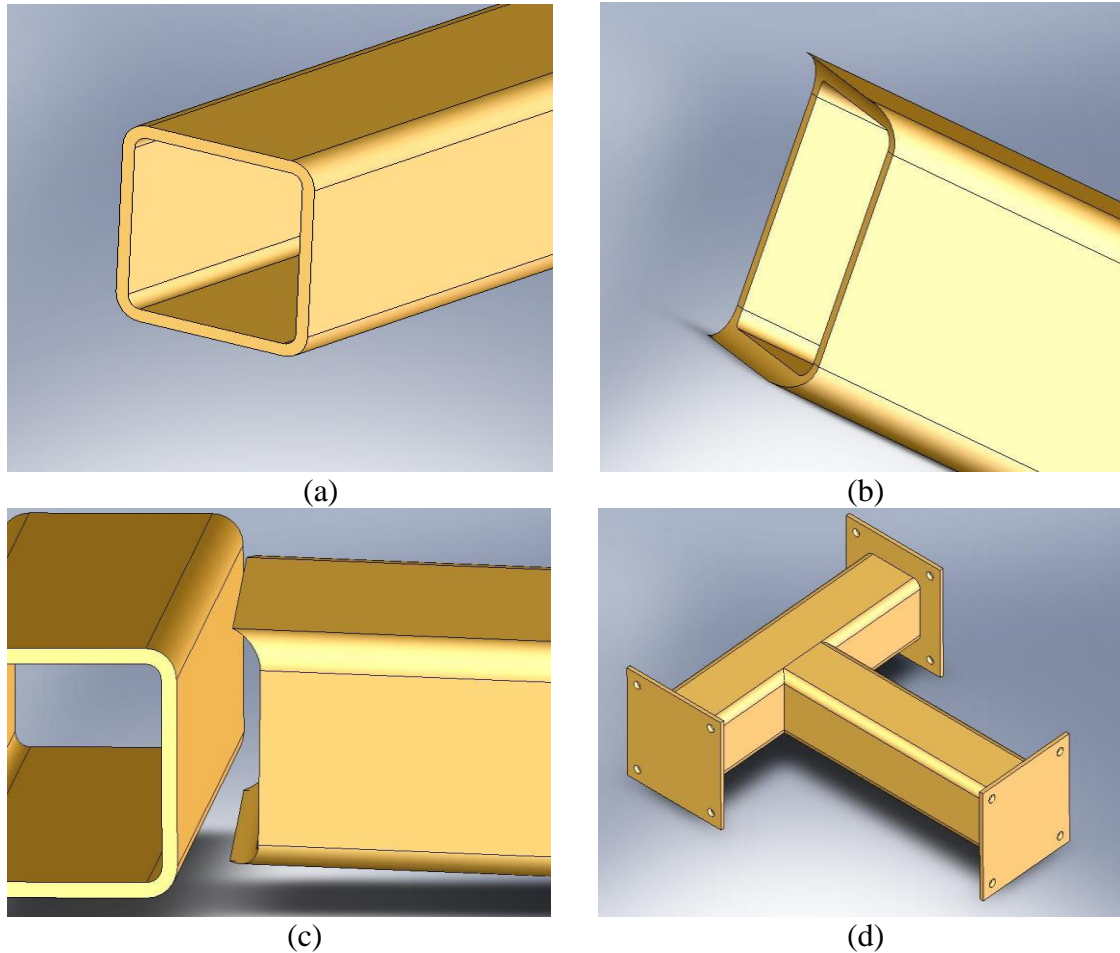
Test specimen: (a ) Schematics of traditional mechanical cut edge (b-c) Schematics of laser cut edge and (d) the cuped T-joint connection.
